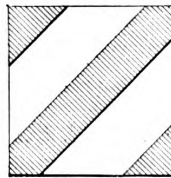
Section Showing Way in which the Double Dovetail is Cut.
